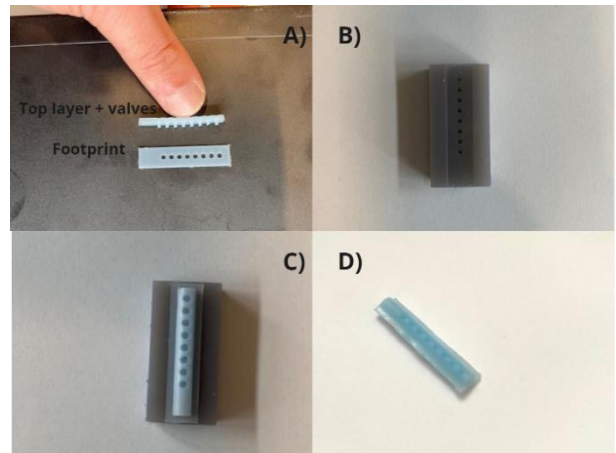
Images of A) the cured parts of the top layer with the self-regulating valves and the footprint, B) the plate used for assembly, C) the parts on the assembly plate, and D) the assembled version of the ProSTATIC.
